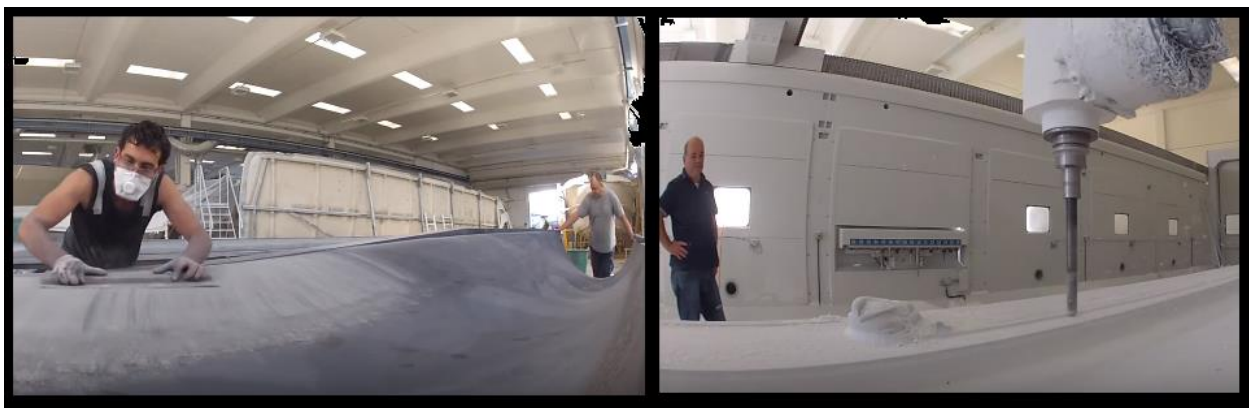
Current Turbine Moulding Process via CNC Machining and Manual Finishing
